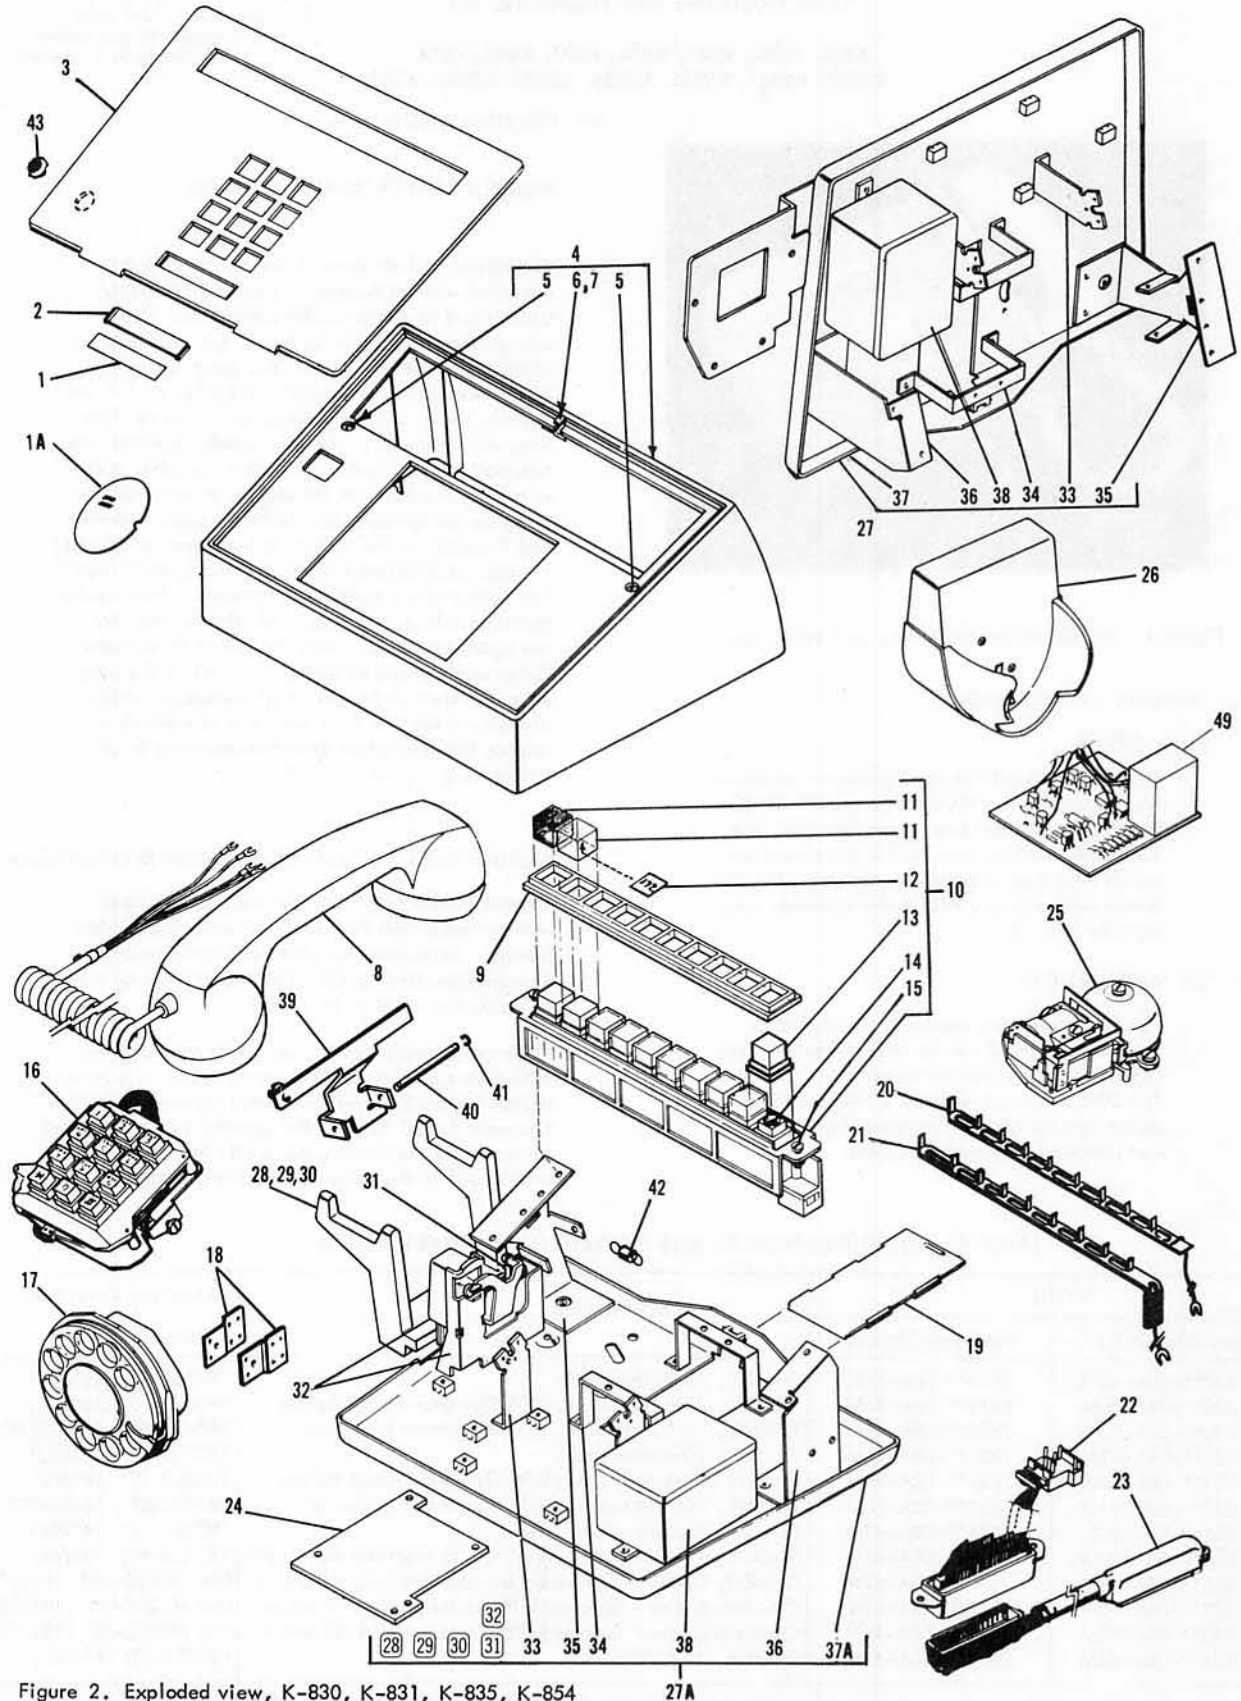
Exploded view, K-830, K-831, K-835, K-854
